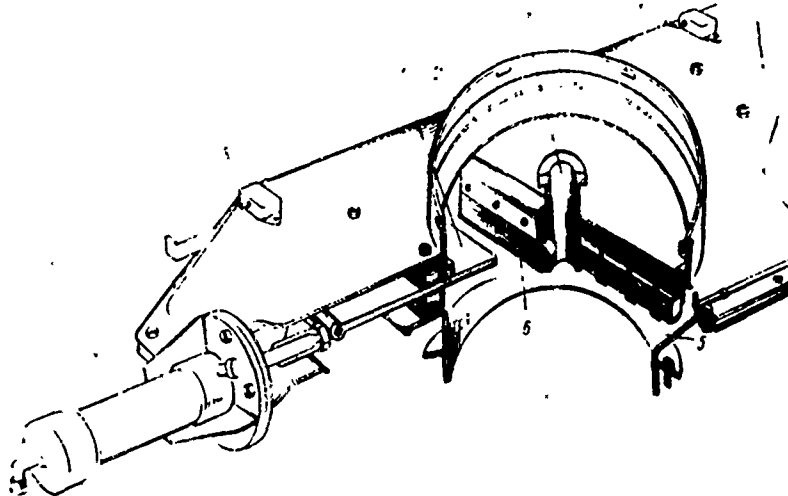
The metering vent: 1 - gate; 2 - cylindrical casing; 3 - sleeve with ball bearing; 4 - upper duct; 5 - lower duct; 6 - rubber buffer; 7 - pneumatic cylinder; 8 - end switch.
